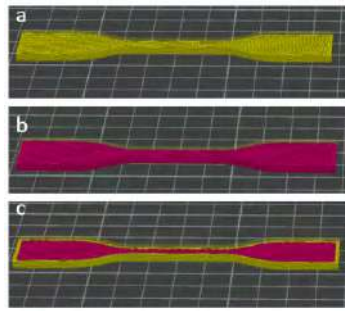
a) Virgin PETG specimen b) virgin PLA specimen c) PETG-PLA specimen
